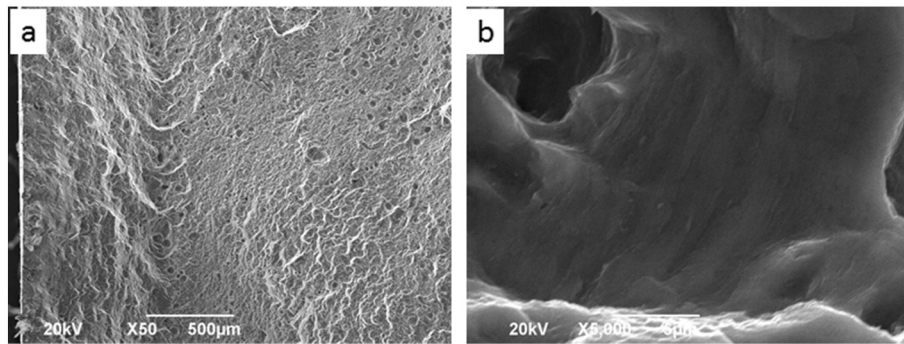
Fracture morphologies of welded joints under 60% humidity. (a) Crack source zone; (b) crack propagation zone.
